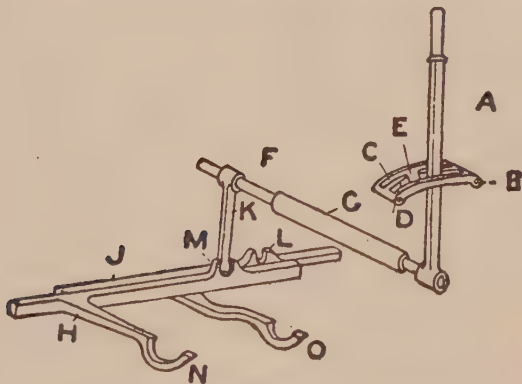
View of gear shifting lever, selector, and operating mechanism of a selective transmission. The parts are: A, gear shifting lever; C, D, slots in selector; E, gate; F, oscillating shaft; G, bearing for oscillating shaft; K, selector lever; M, L, selector lever slots; H, J, selector bars; N, O, fingers for shifting sliding gears.
